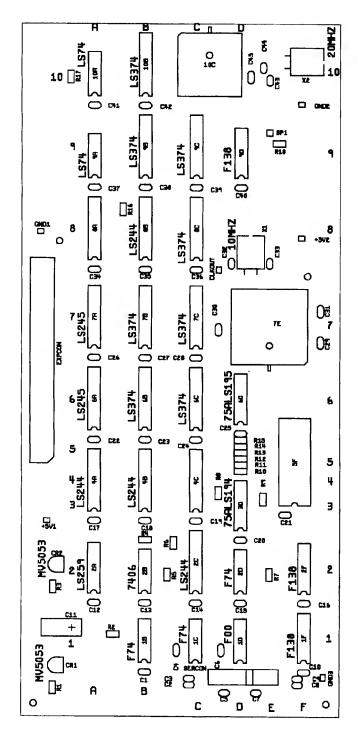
DSPCOM PCB Assembly A049348-01 A
